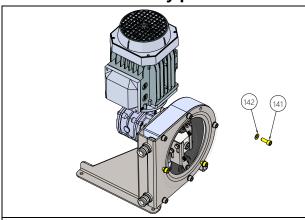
Unscrew the front cover mounting screws [141], and remove them with their washers [142].
